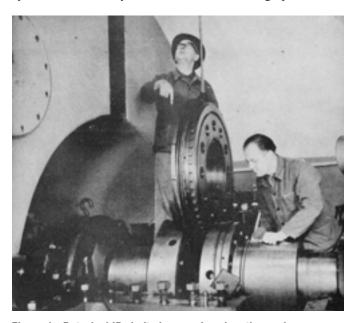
Detached IP shaft plug was found resting on inner diameter of the turning gear.
